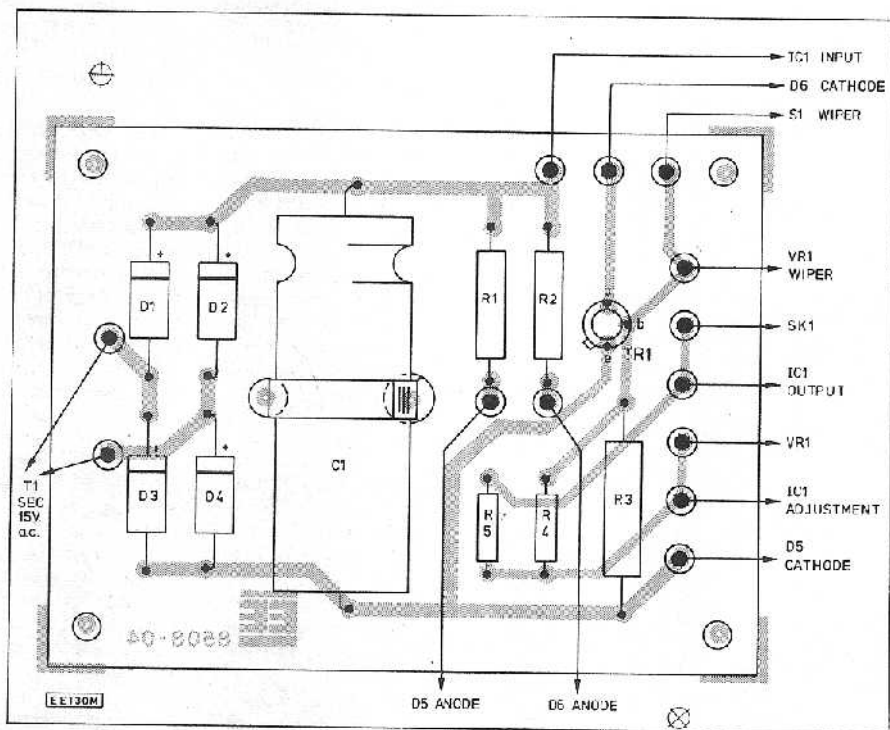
Component layout and interwiring details for the Drill Control Unit.
